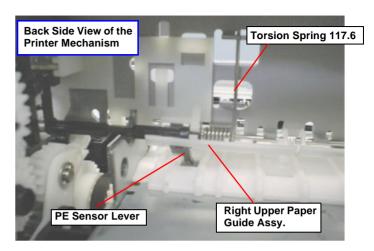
Installing the Right Upper Paper Guide Assy.
